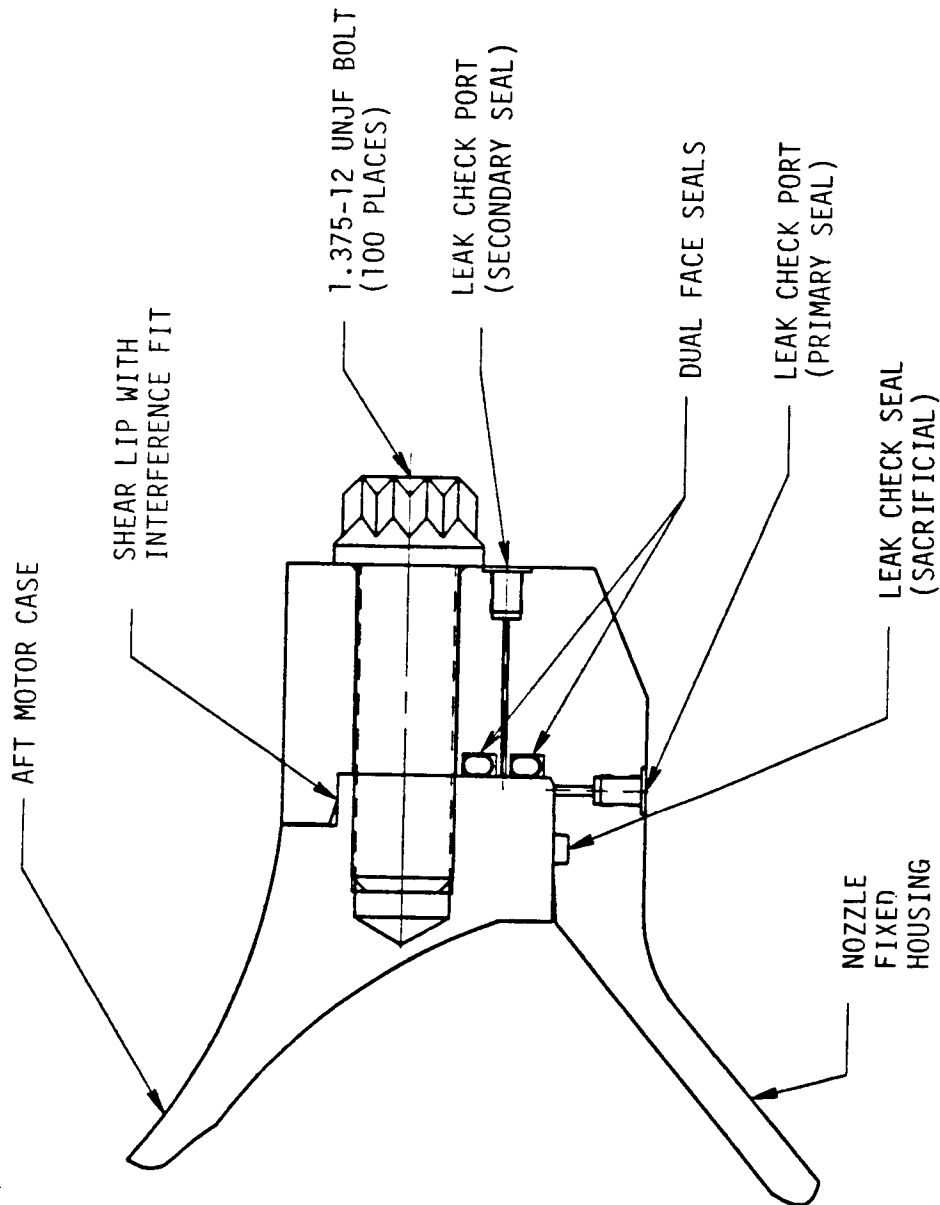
BLOCK II NOZZLE-TO-CASE JOINT DESIGN.
